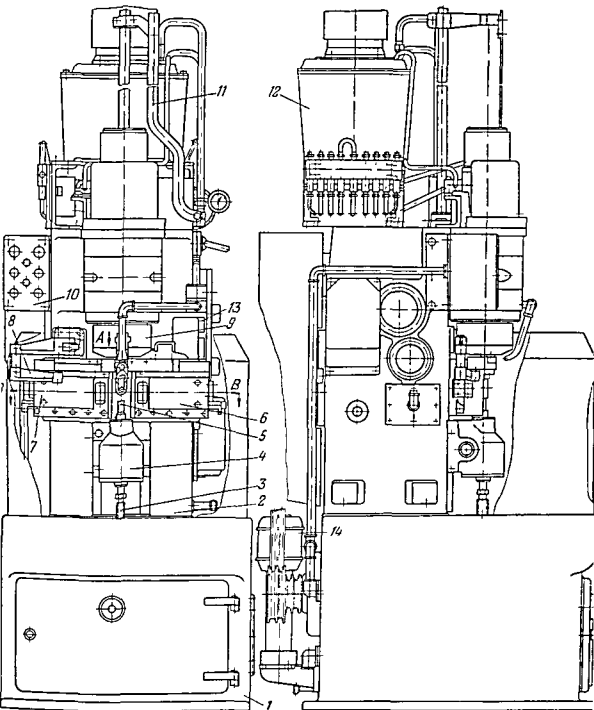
Automatic vertical cutting-off machine, model JA-17
